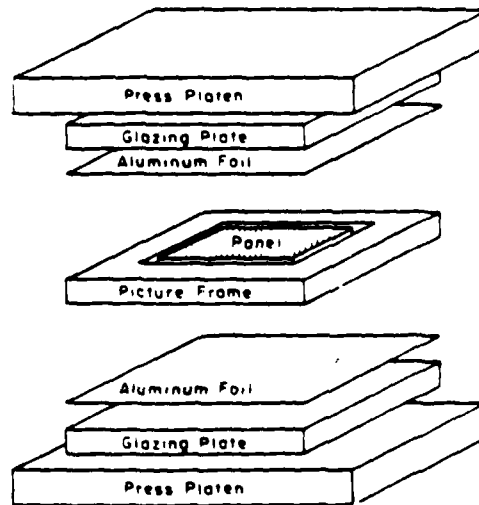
MOLD STACK USED FOR THERMOPLASTIC PROCESSING.
